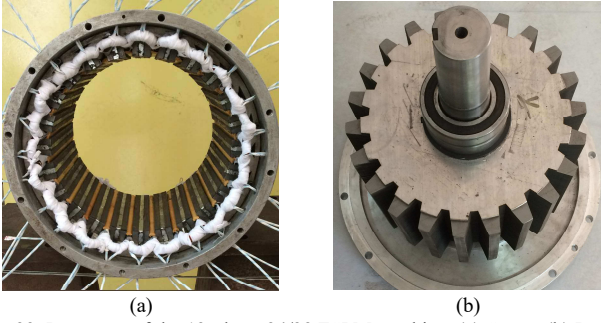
Prototype of the 12-phase 24/22 FSPM machine. (a) Stator. (b) Rotor.
